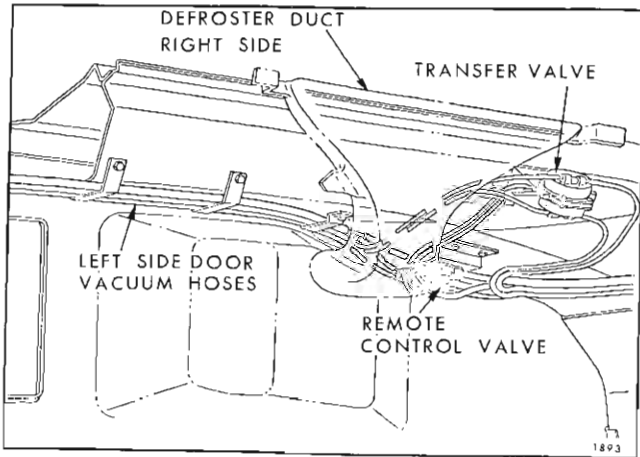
D49—Transfer Valve and Remote Control Valve Installation
